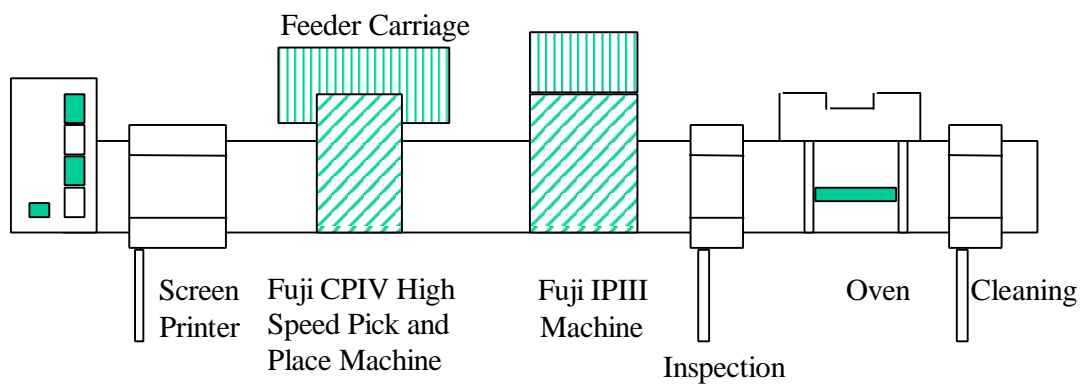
Printed Circuit Card Assembly System Illustration
